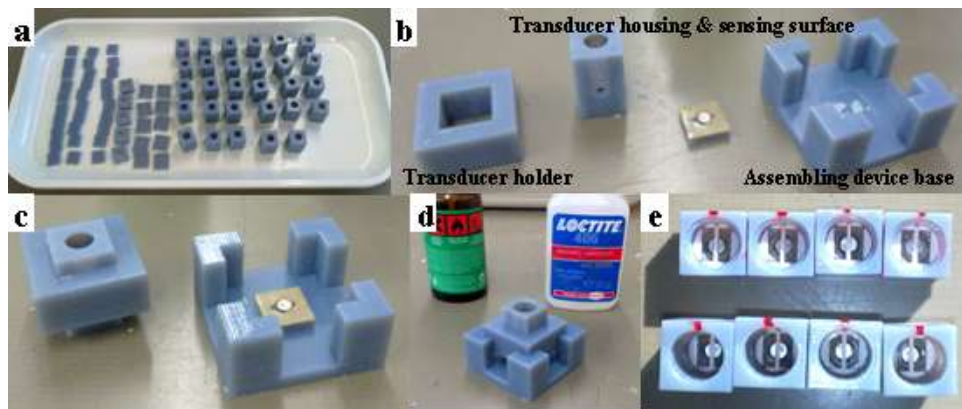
Steps in the batch production of the biaxial shear transducers. Transducer housings and sensing surface plates from the 3D printer (a). The magnet and elastomeric material bonded to the sensing surface plate (b) before placement in the assembling device (c) for bonding the transducer housing to the surface plate (d). The sensor IC spacers were then placed inside the transducer housings before the hall-effect sensor ICs circuit boards were installed (e).
